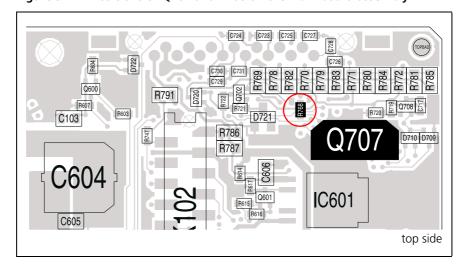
Positions of Q707 and R768 on the main board assembly
